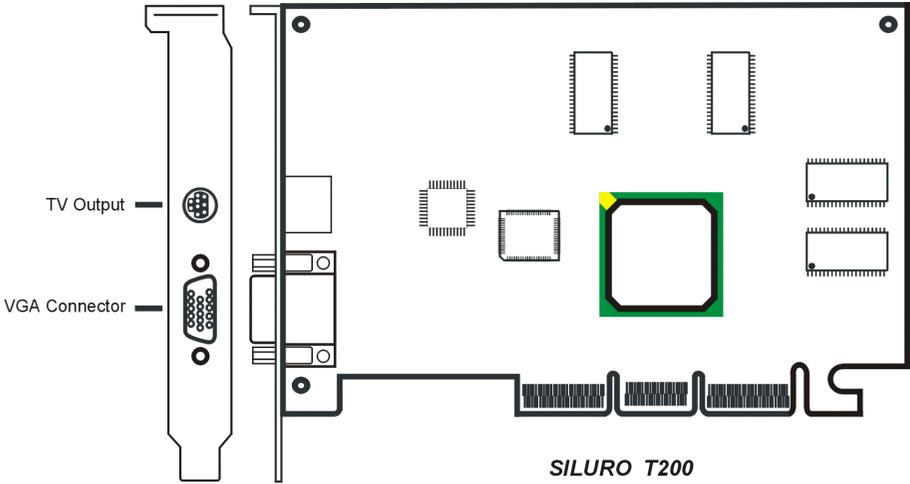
SILURO™ T200 32MB SDRAM VGA/TV-Out Layout
